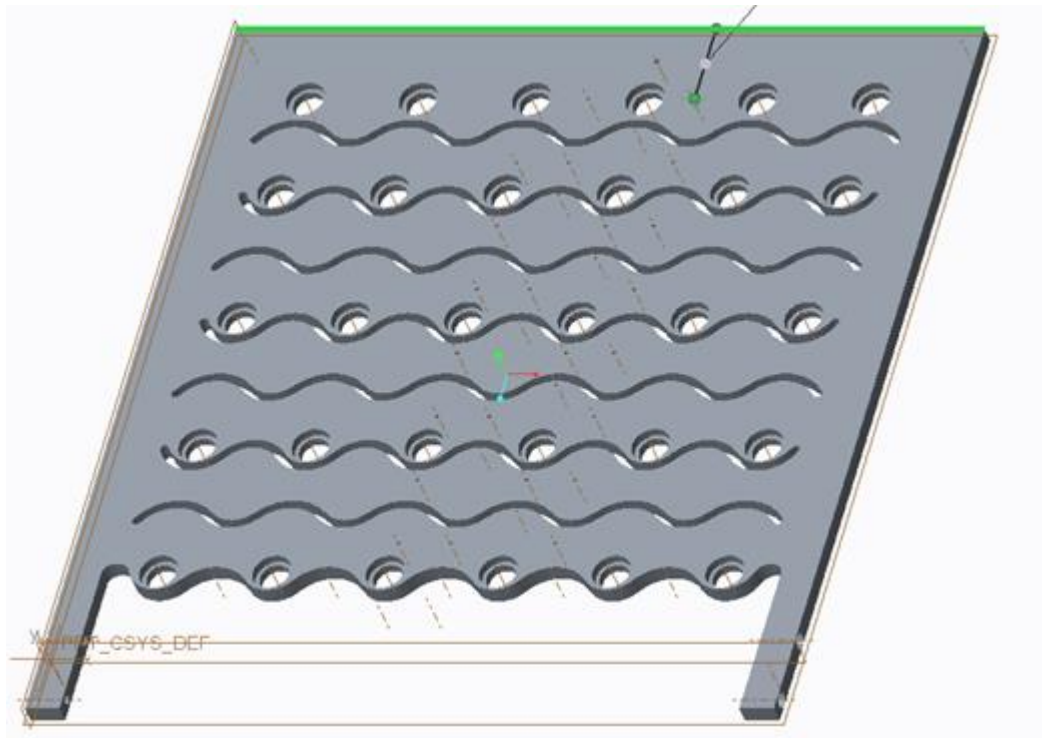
3D Model Sketch of the Top Plate (Cool Side Plate).
